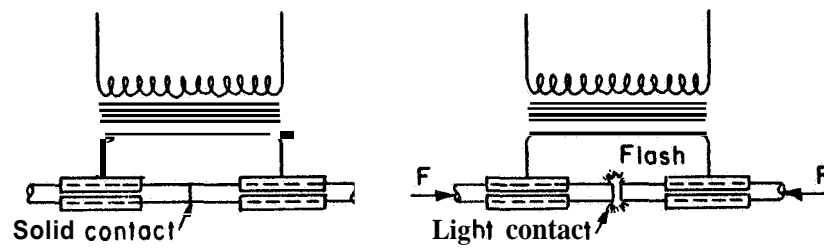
SKETCH SHOWING BASIC CHARACTERISTICS OF FLASH-WELDING PROCESS (Ref. 20)
